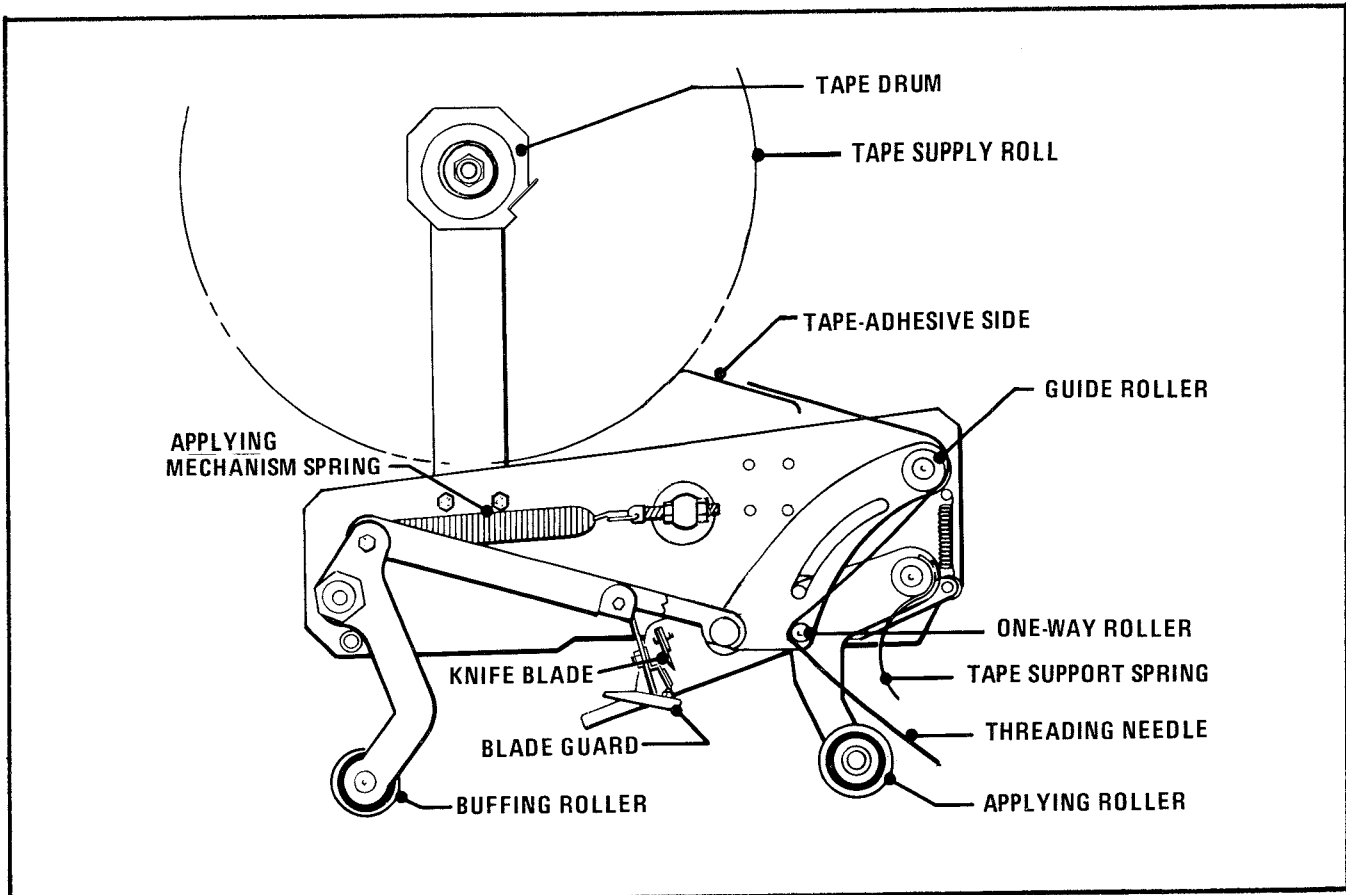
A - TAPE THREADING DIAGRAM - TOP TAPING HEAD - LEFT SIDE VIEW
